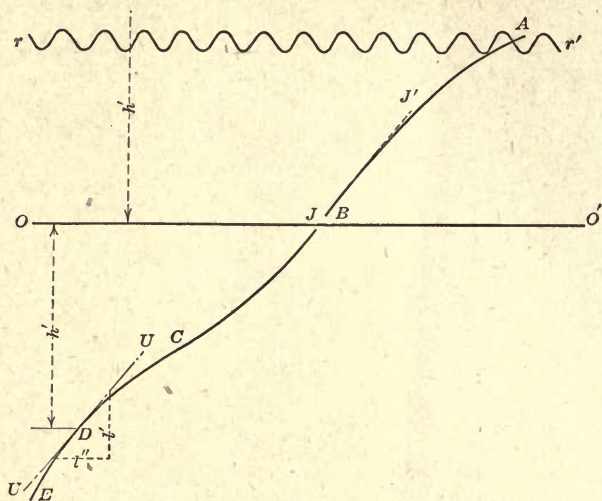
Drum record, Turner impact machine. Specimen broken in single blow.
